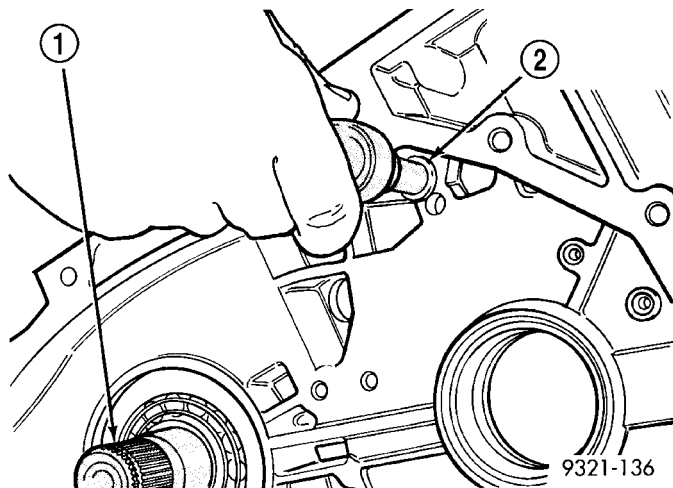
Install Parking Sprag Pivot Retaining Screw
